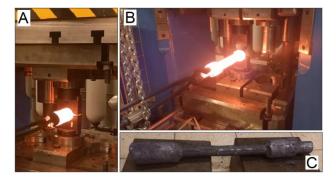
Results of forging tests on a hydraulic press. A,B - forging process, C - forging.
